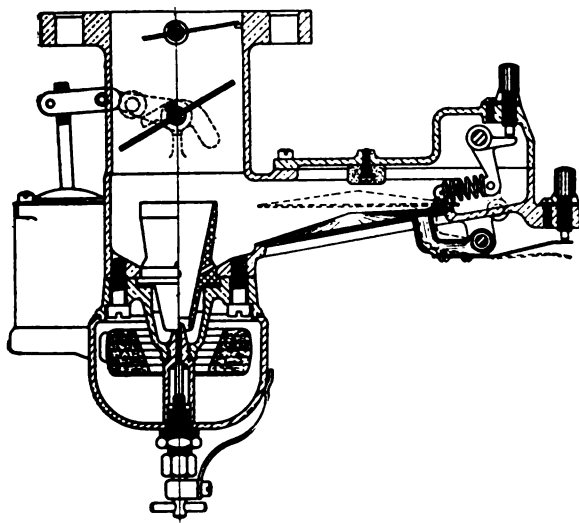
(below)—Vertical section of 2-in. carburetor used in the tests
